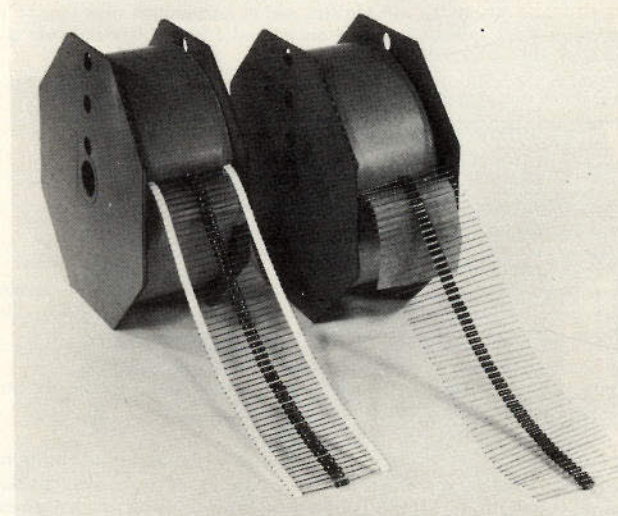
Axial-lead components, lead-taped and body-taped, placed on reels with interliner ready for feeding into an insertion mechanism.
